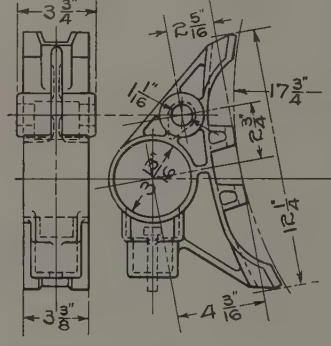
Creco Standard Adjustable Brake Heads. Chicago Railway Equipment Company.
